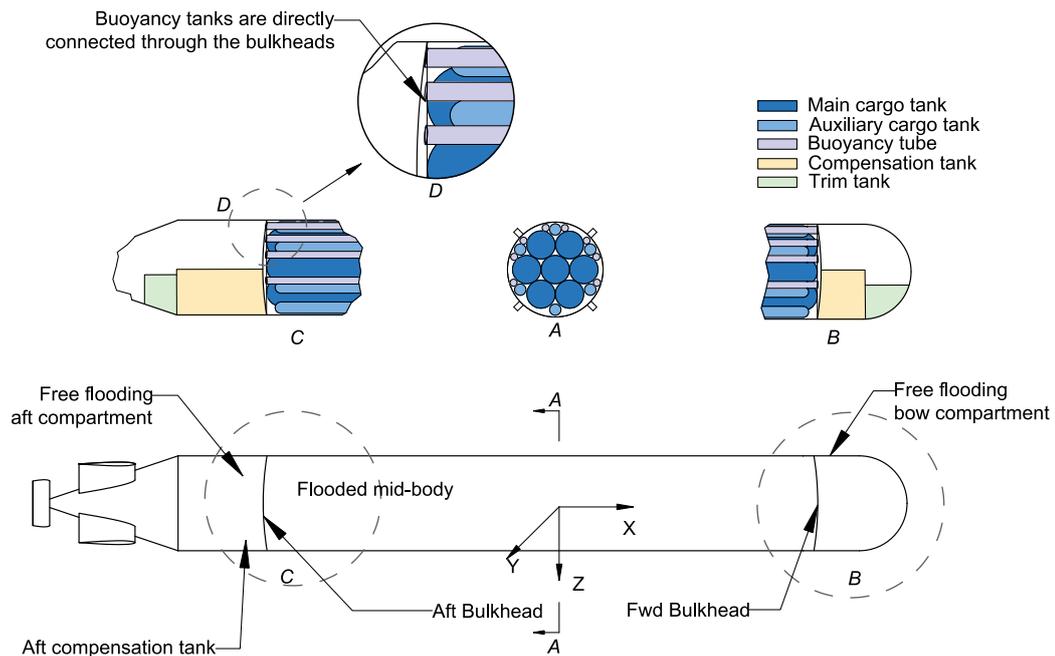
SST general arrangement. A: Mid-vessel cross-section. B: SST fwd bulkhead. C: SST aft bulkhead. D: Buoyancy tank-bulkhead connection [7].
